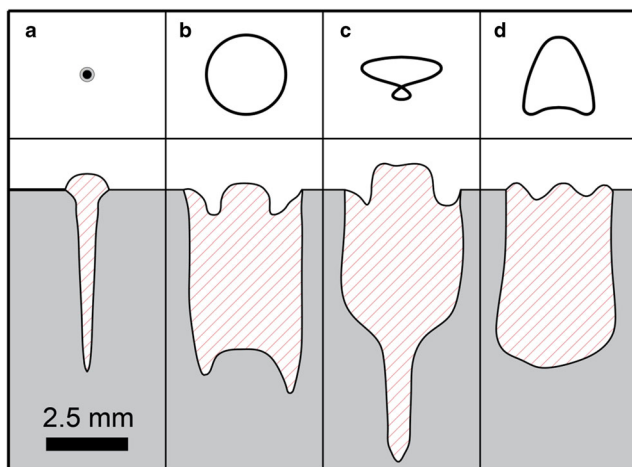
Deflection patterns and corresponding weld geometries [283]
